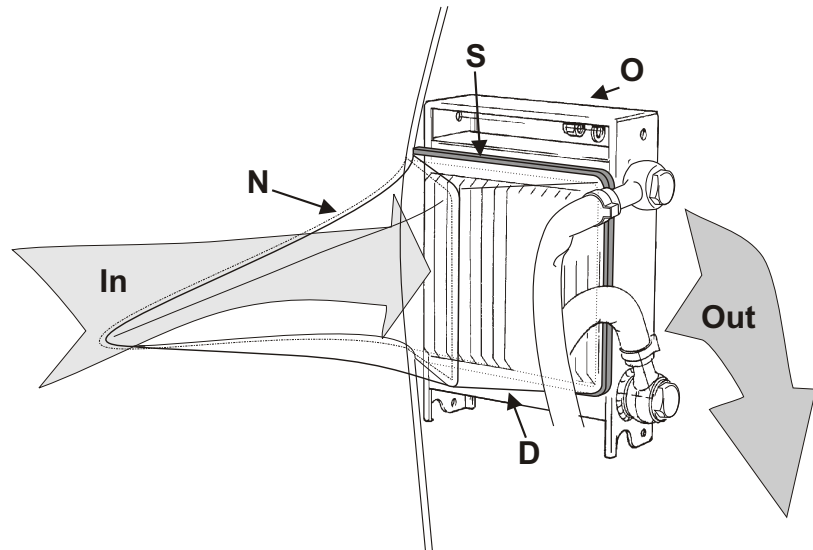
Oil Cooler Installation L 2400 EF (Sample)
